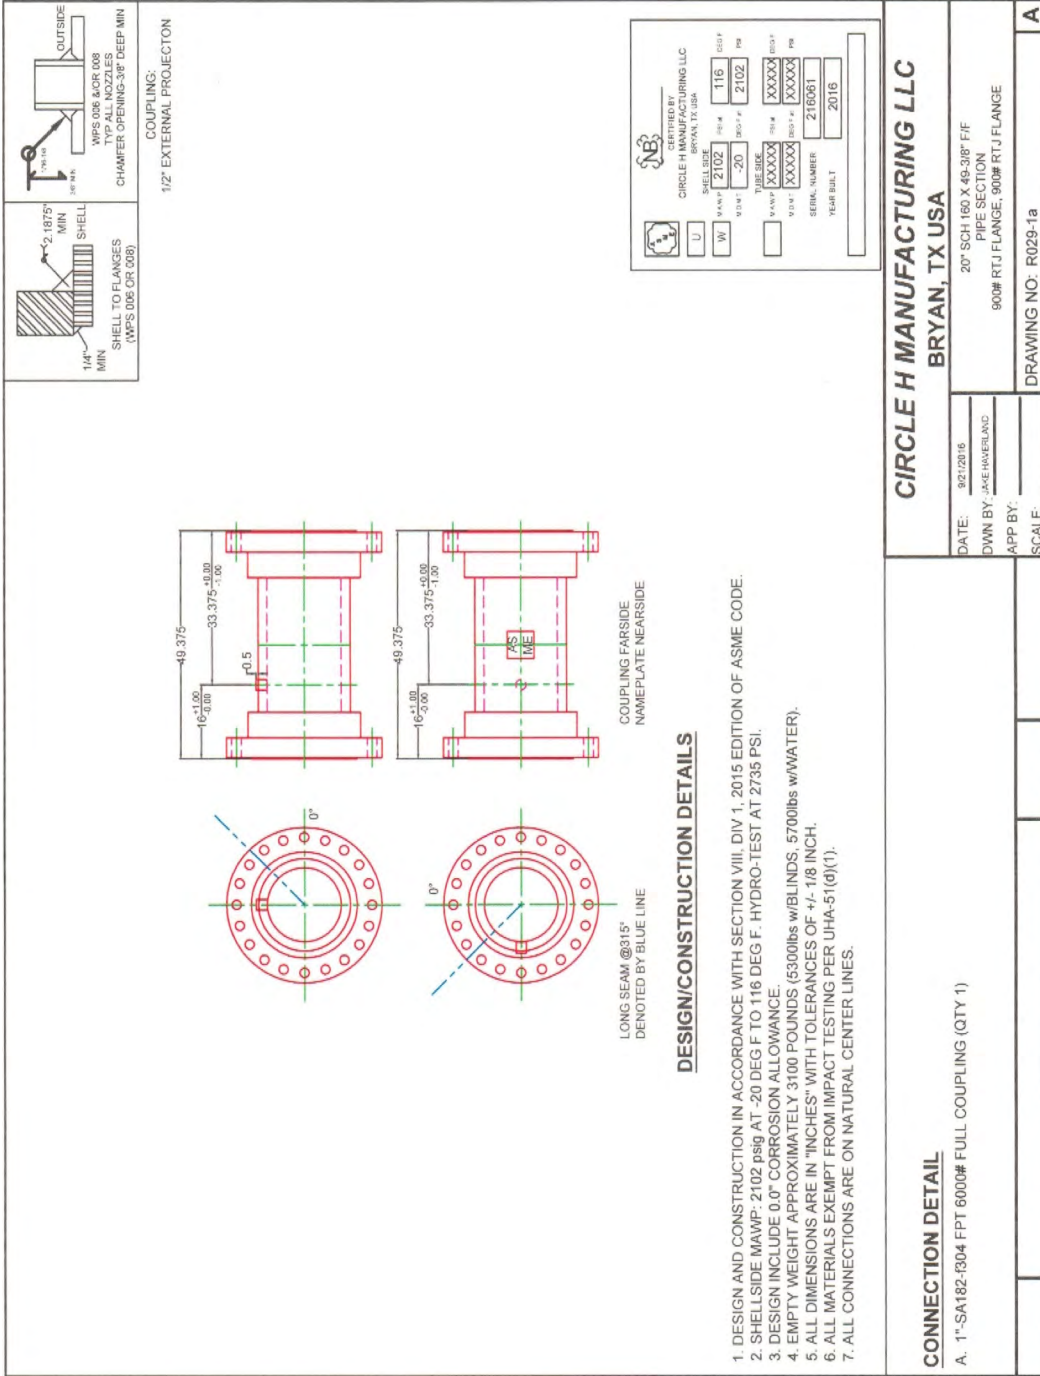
CIRCLE H MANUFACTURING DRAWING OF THE DRIVER AS CERTIFIED AND APPROVED.
